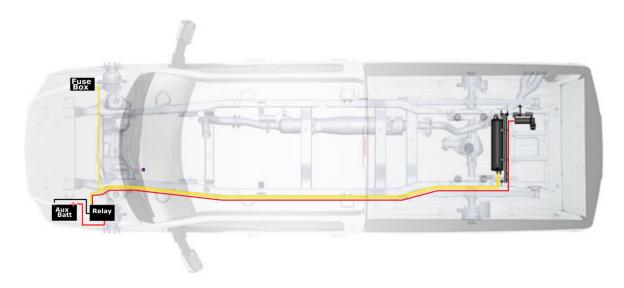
Recommended Electrical Routing (Grounding Points Not Shown)
